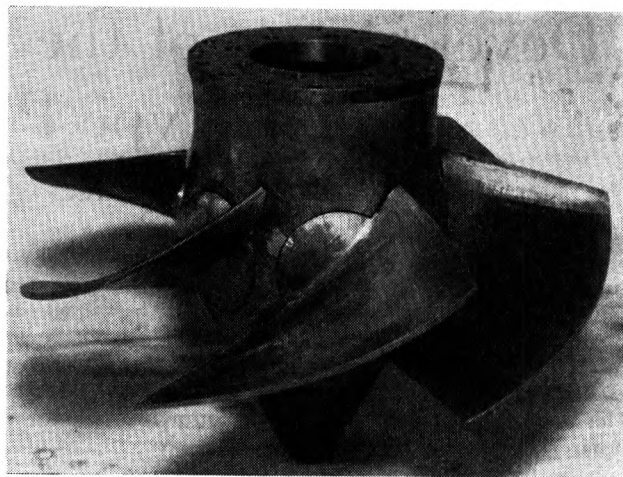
RUNNER MODEL WITH SIX BLADES; 16 1/2-IN. SIZE
